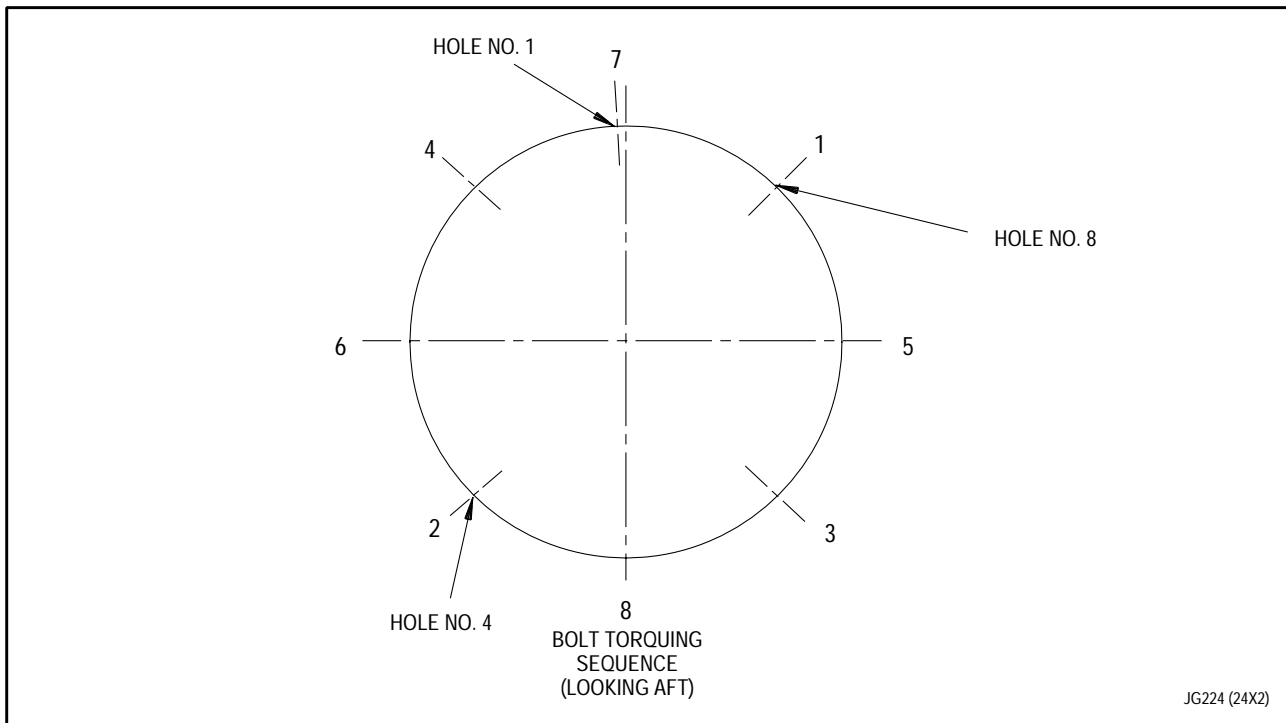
Compressor Exit Stator Assembly - Bolt Torque Sequence
